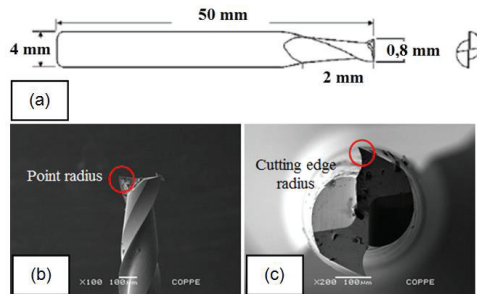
(a) Dimensions of the micro tool, (b) Point radius and (c) Cutting edge radius.
